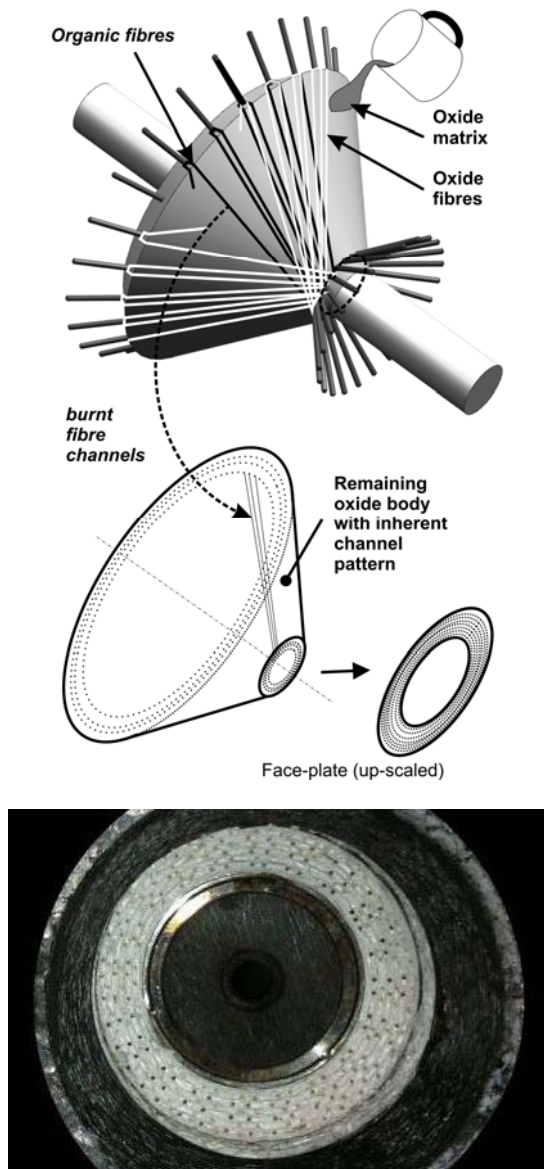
Improved CMC injector element technology. Winding process (top). Demonstrator element showing high definition injection channel pattern (bottom)
